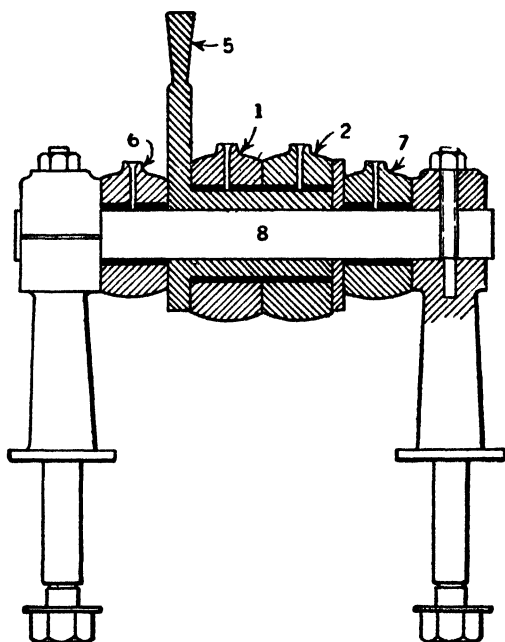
Arrangement of Rocker Arms of Valve Gear Shown in Fig. 94
